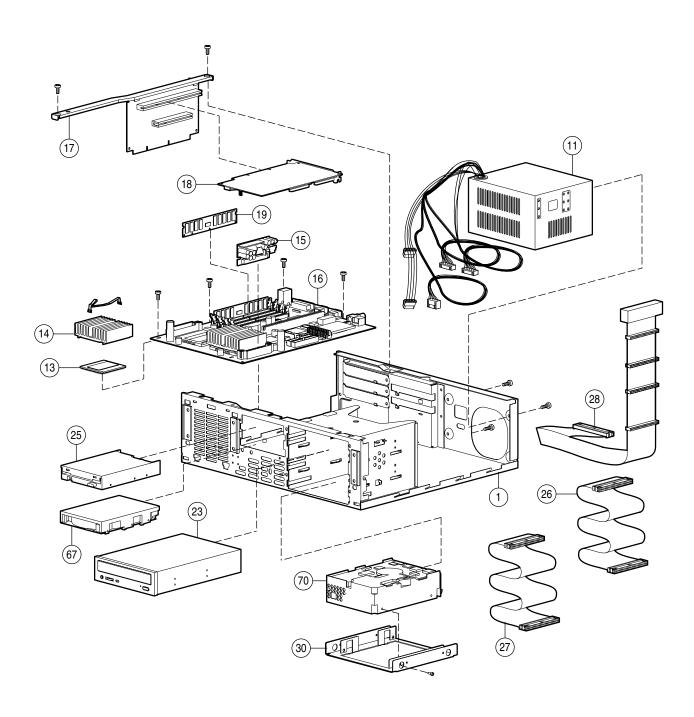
System Components Exploded View of the Compaq ProLiant 850R 6/200N
